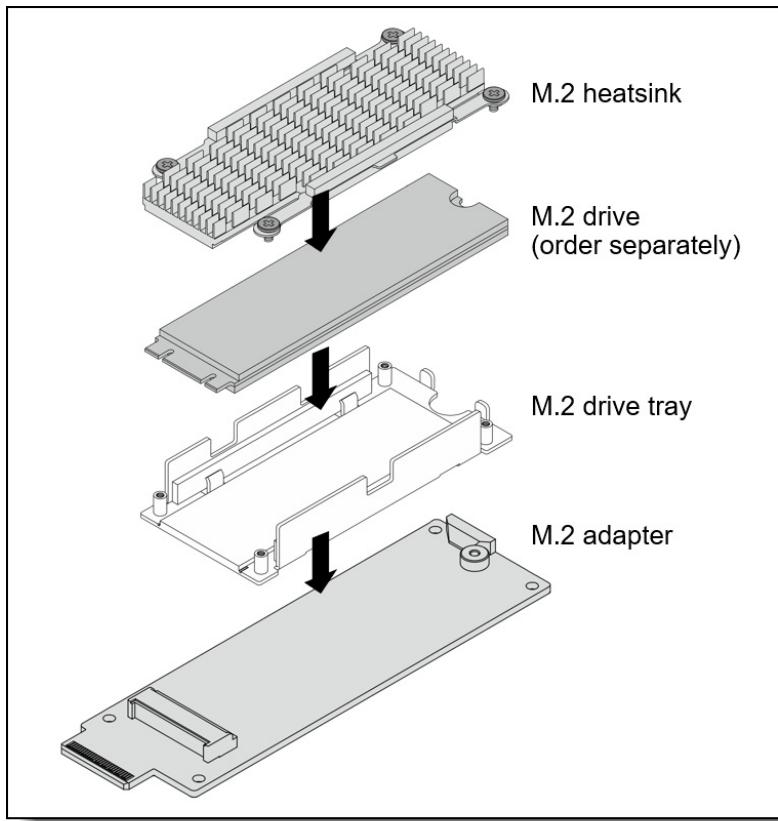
Components of the ThinkSystem V4 Hot Swap M.2 SATA/NVMe Drive Assembly Kit
